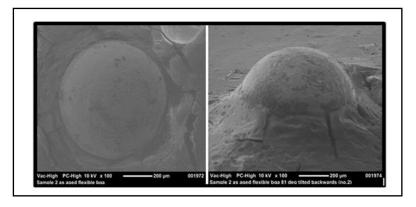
SEM images of the BGA solder joints test of the 33hours of ATC
